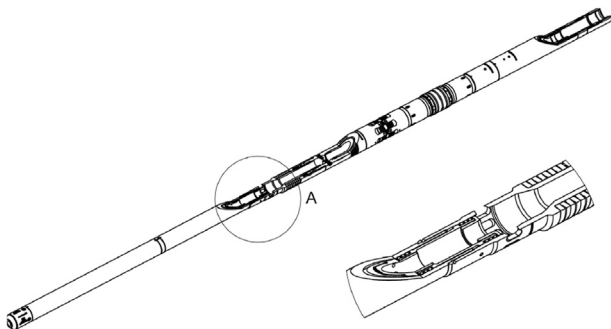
Quinterra Technologies shut-in valve type STC on an RPD type retrievable packer.
